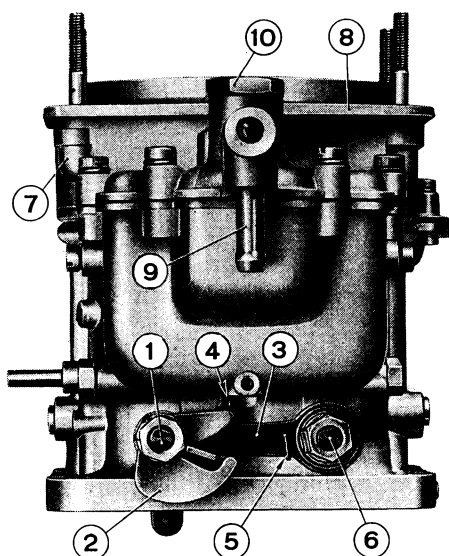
Weber 34 DCHD 4 carburetor for engine 115 C.005.
